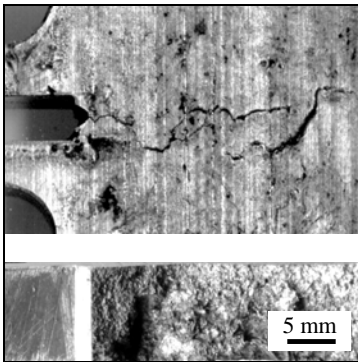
Crack on specimen surface and fracture surface of CT specimen of porous layer.
